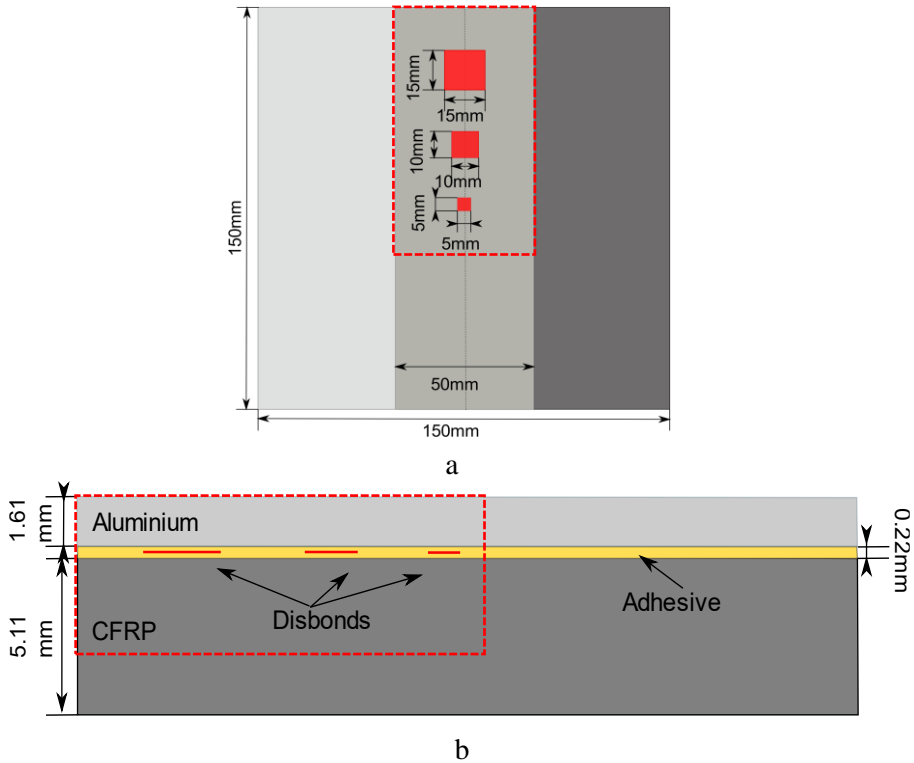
Joint of dissimilar materials of bonded aluminium to CFRP and defects: (a) top view, (b) cross-sectional view
